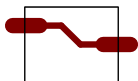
Design of the PCB contacting the simplified sensor (see Section 6.1). Scale 2:1.
